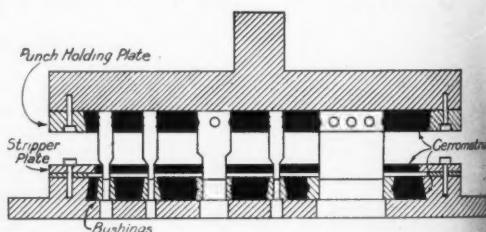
This drawing illustrates an inexpensive method of making a piercing die, including the stripper plate. The essential parts are the punch holder, die shoe and stripper plate with large apertures, punches with bushings to fit, and a template of the perforated blank for use in locating the punches and bushings.
